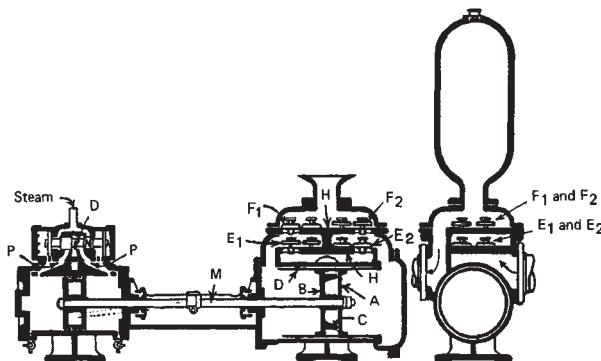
Double-acting steam-driven reciprocating pump.
